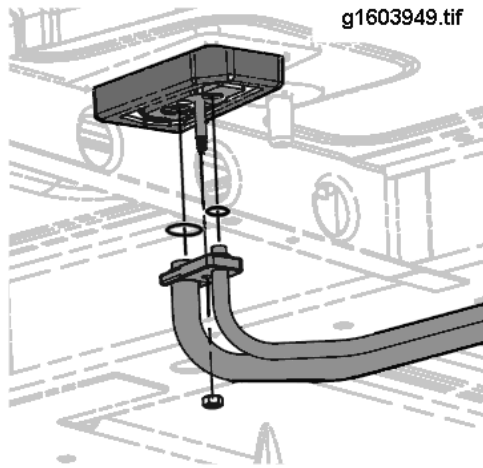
Connecting A/C Lines to Thermal Expansion Valve
